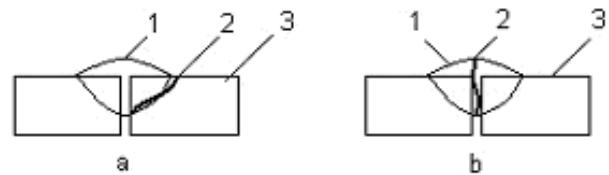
Diagram of breaking the welded connection obtained by welding steel 20X23H18 by different electrodes: a – the destruction of a seam in the dilution zone; b – destruction in the zone of close one to center seam. 1 – the weld, 2 – the place of crack formation, 3 – the base metal
